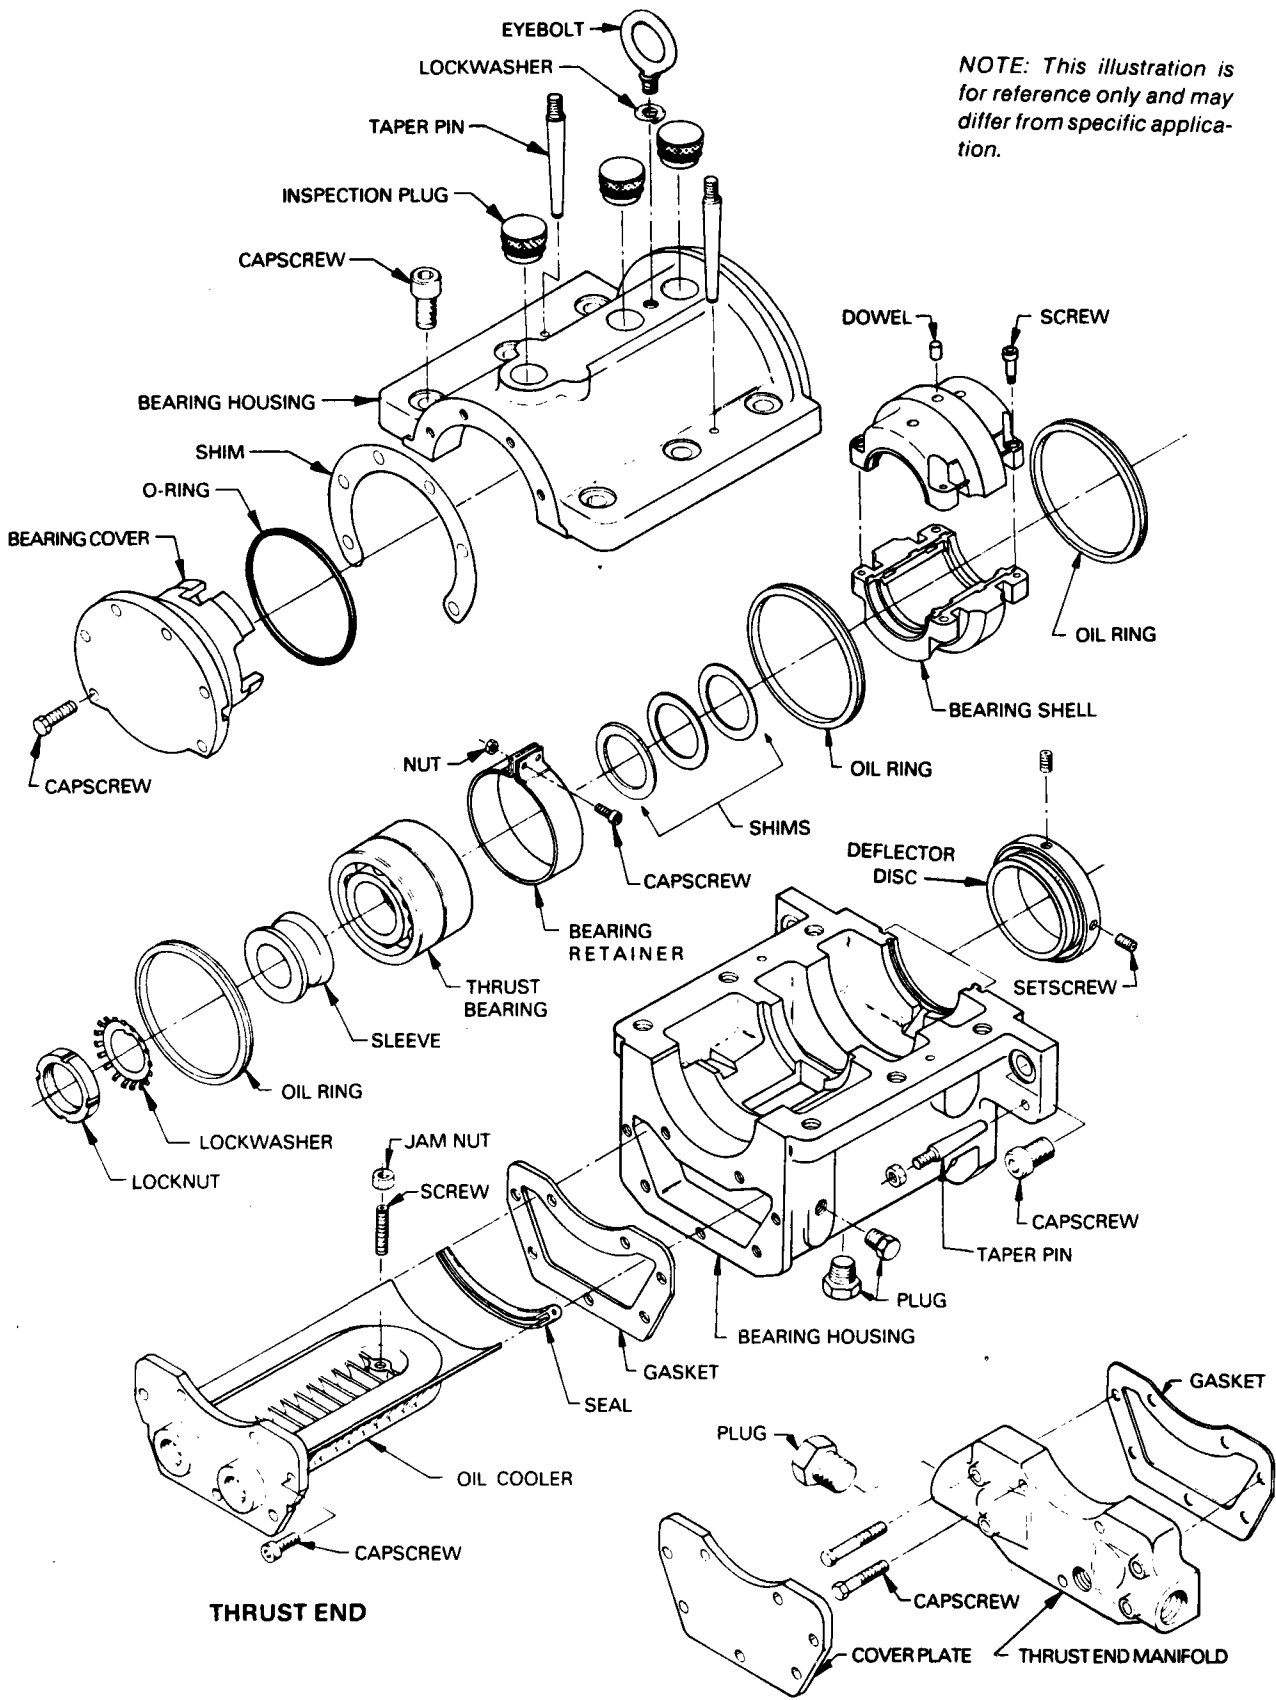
Typical ball thrust and sleeve journal bearing, thrust end
